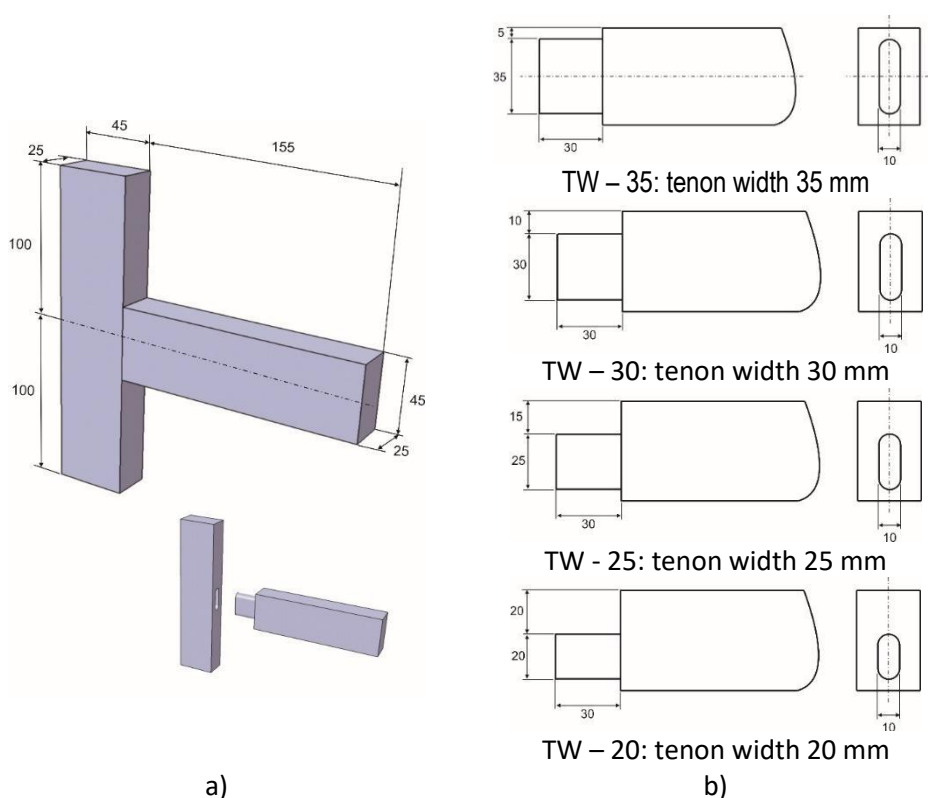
T-shaped mortise and tenon joints: a) specimen geometry, b) four tenon widths and positions
